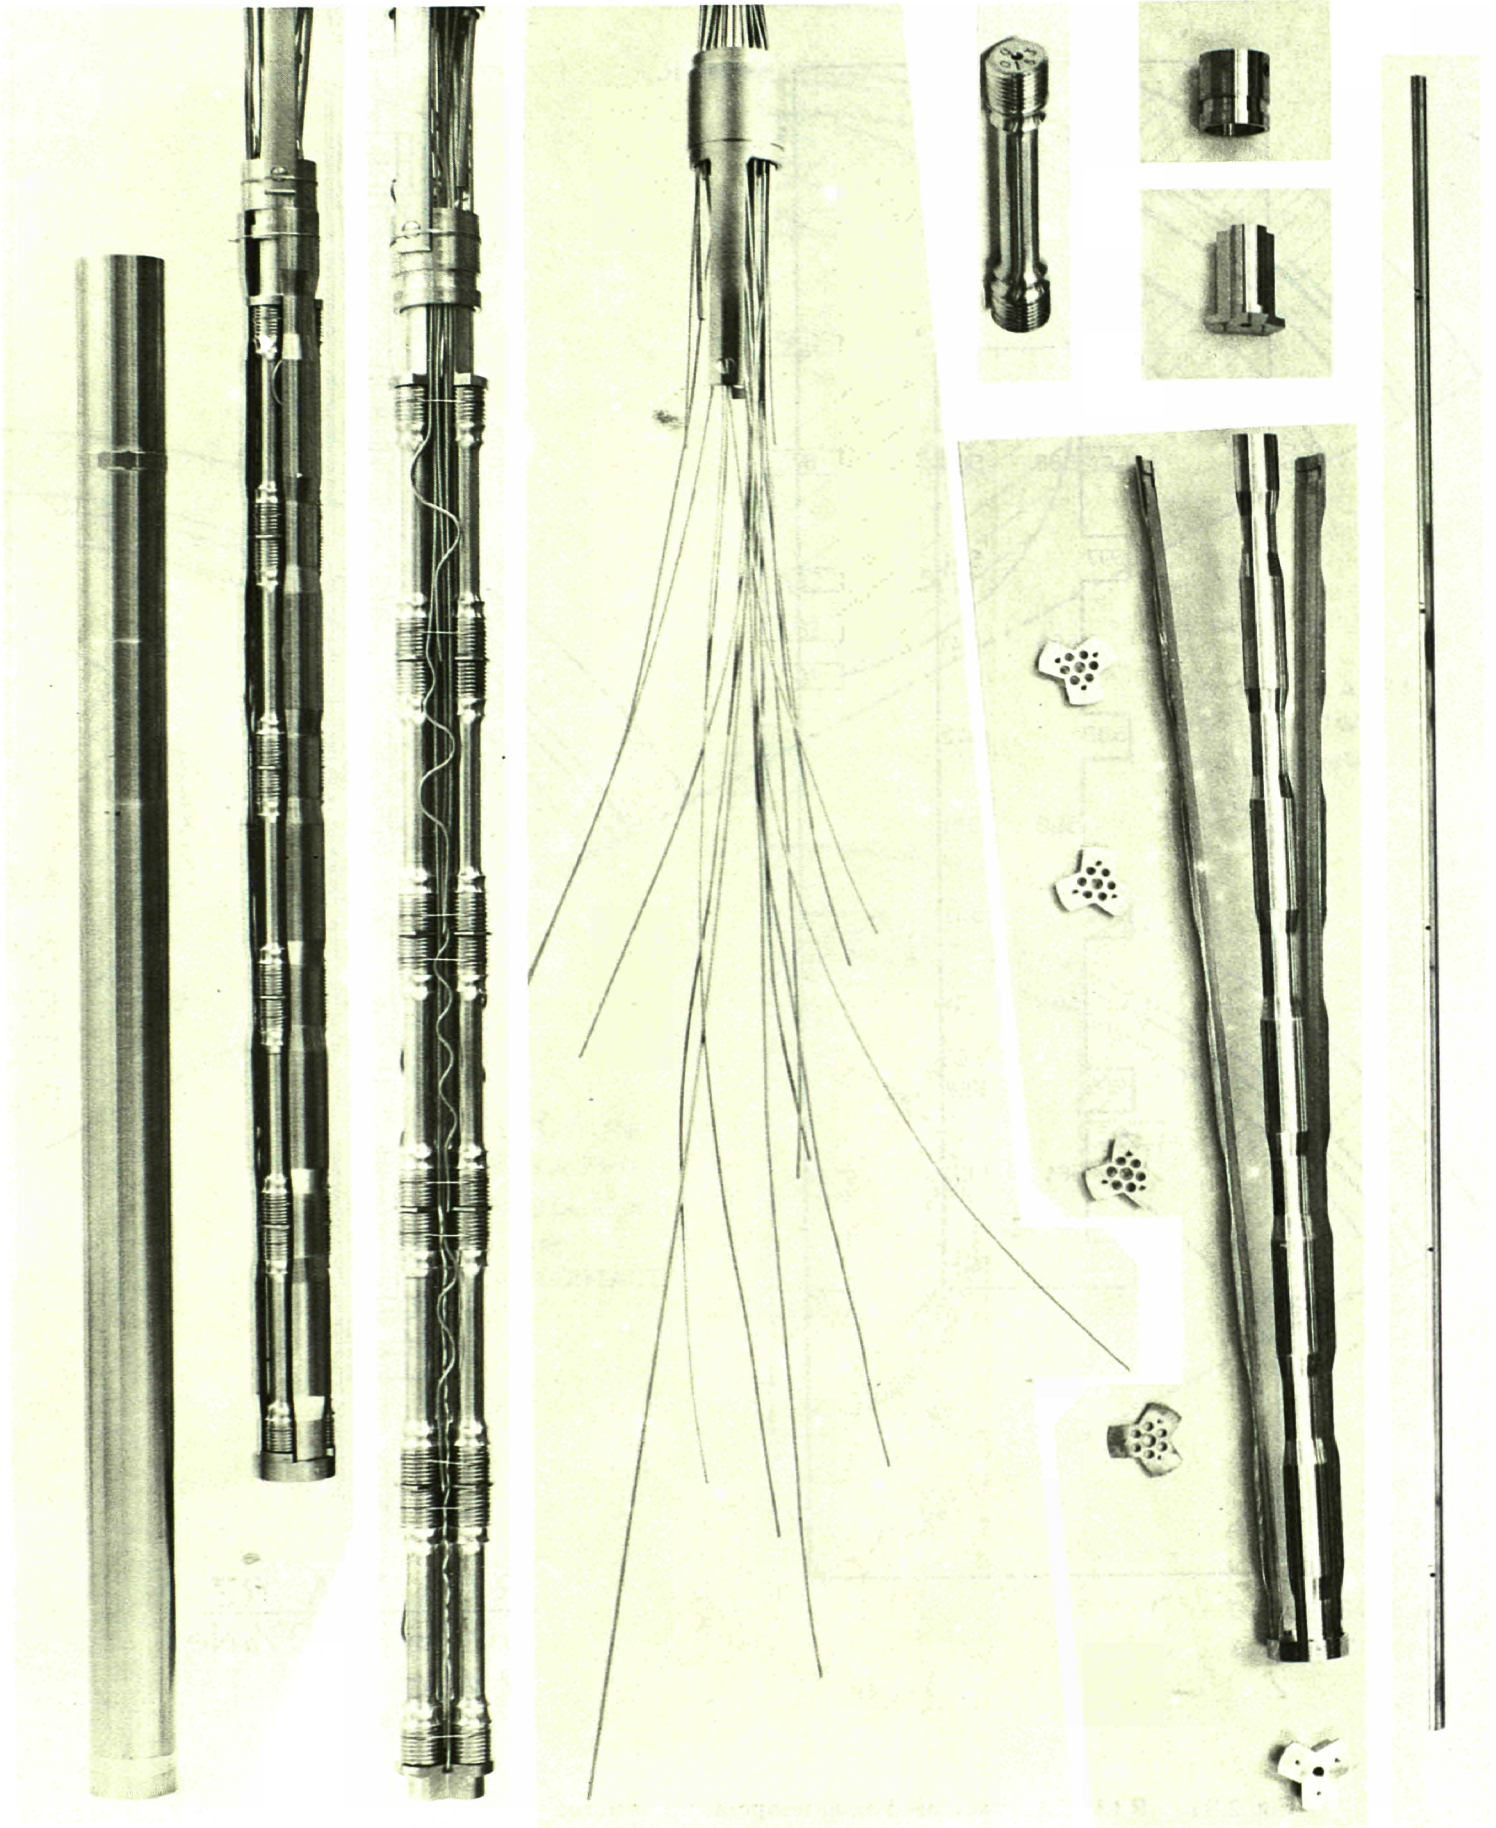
R139-2A, components and subassemblies of the prototype capsule containing 15 specimens.
